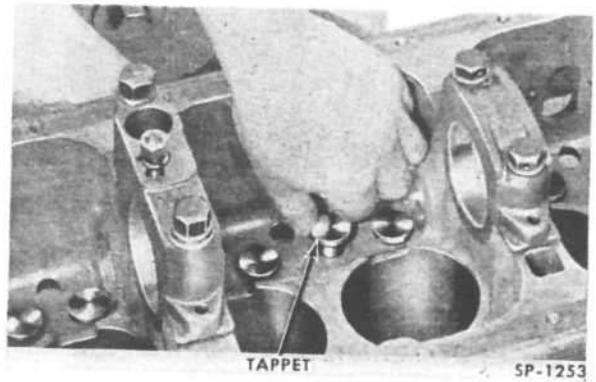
REMOVING VALVE TAPPET FROM CYLINDER BLOCK
